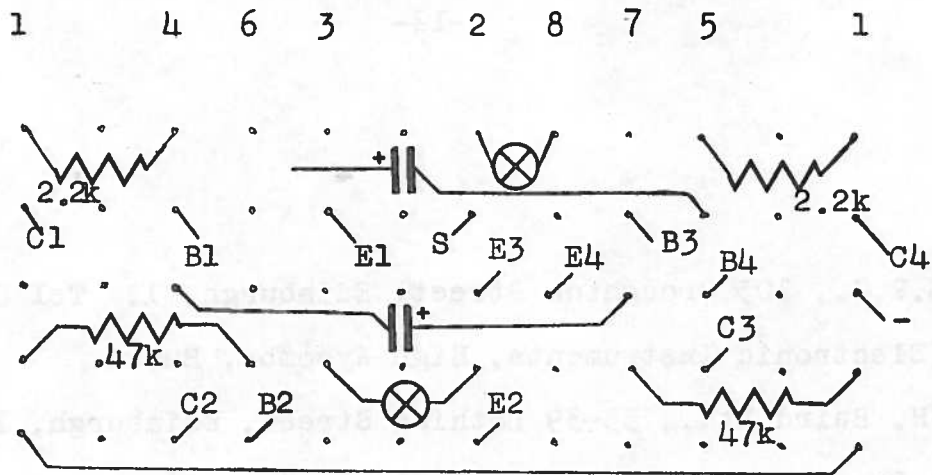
Connecting strips run vertically on this board. Notice the wire connecting the two extreme strips.
